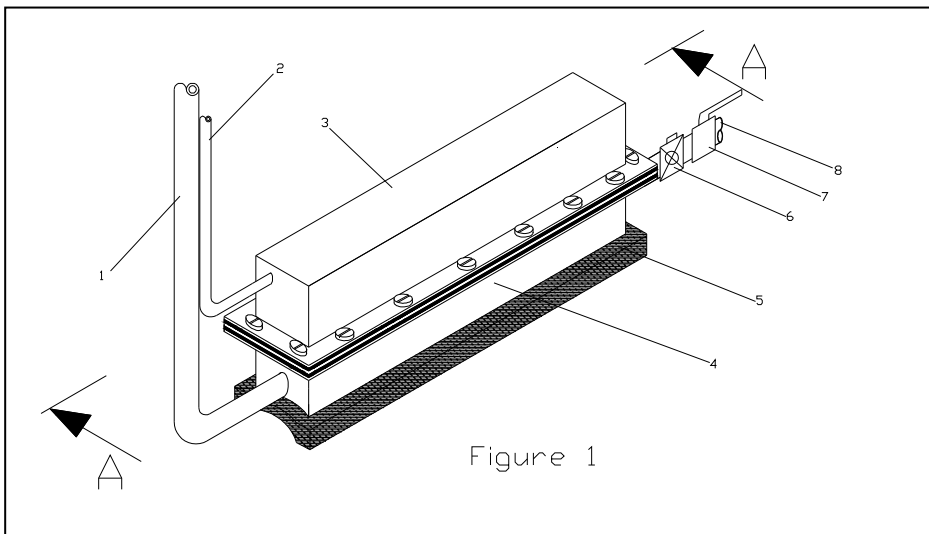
View of a sample of the equipment for pipeline leaking hole or crack geometry identification
